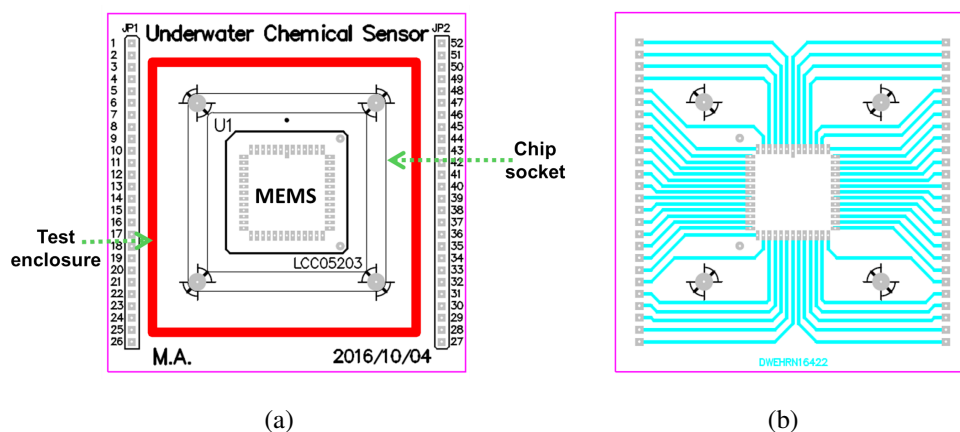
(a) The front-side of the actuation PCB showing the chip socket and (b) the back side of the board showing the electrical traces
